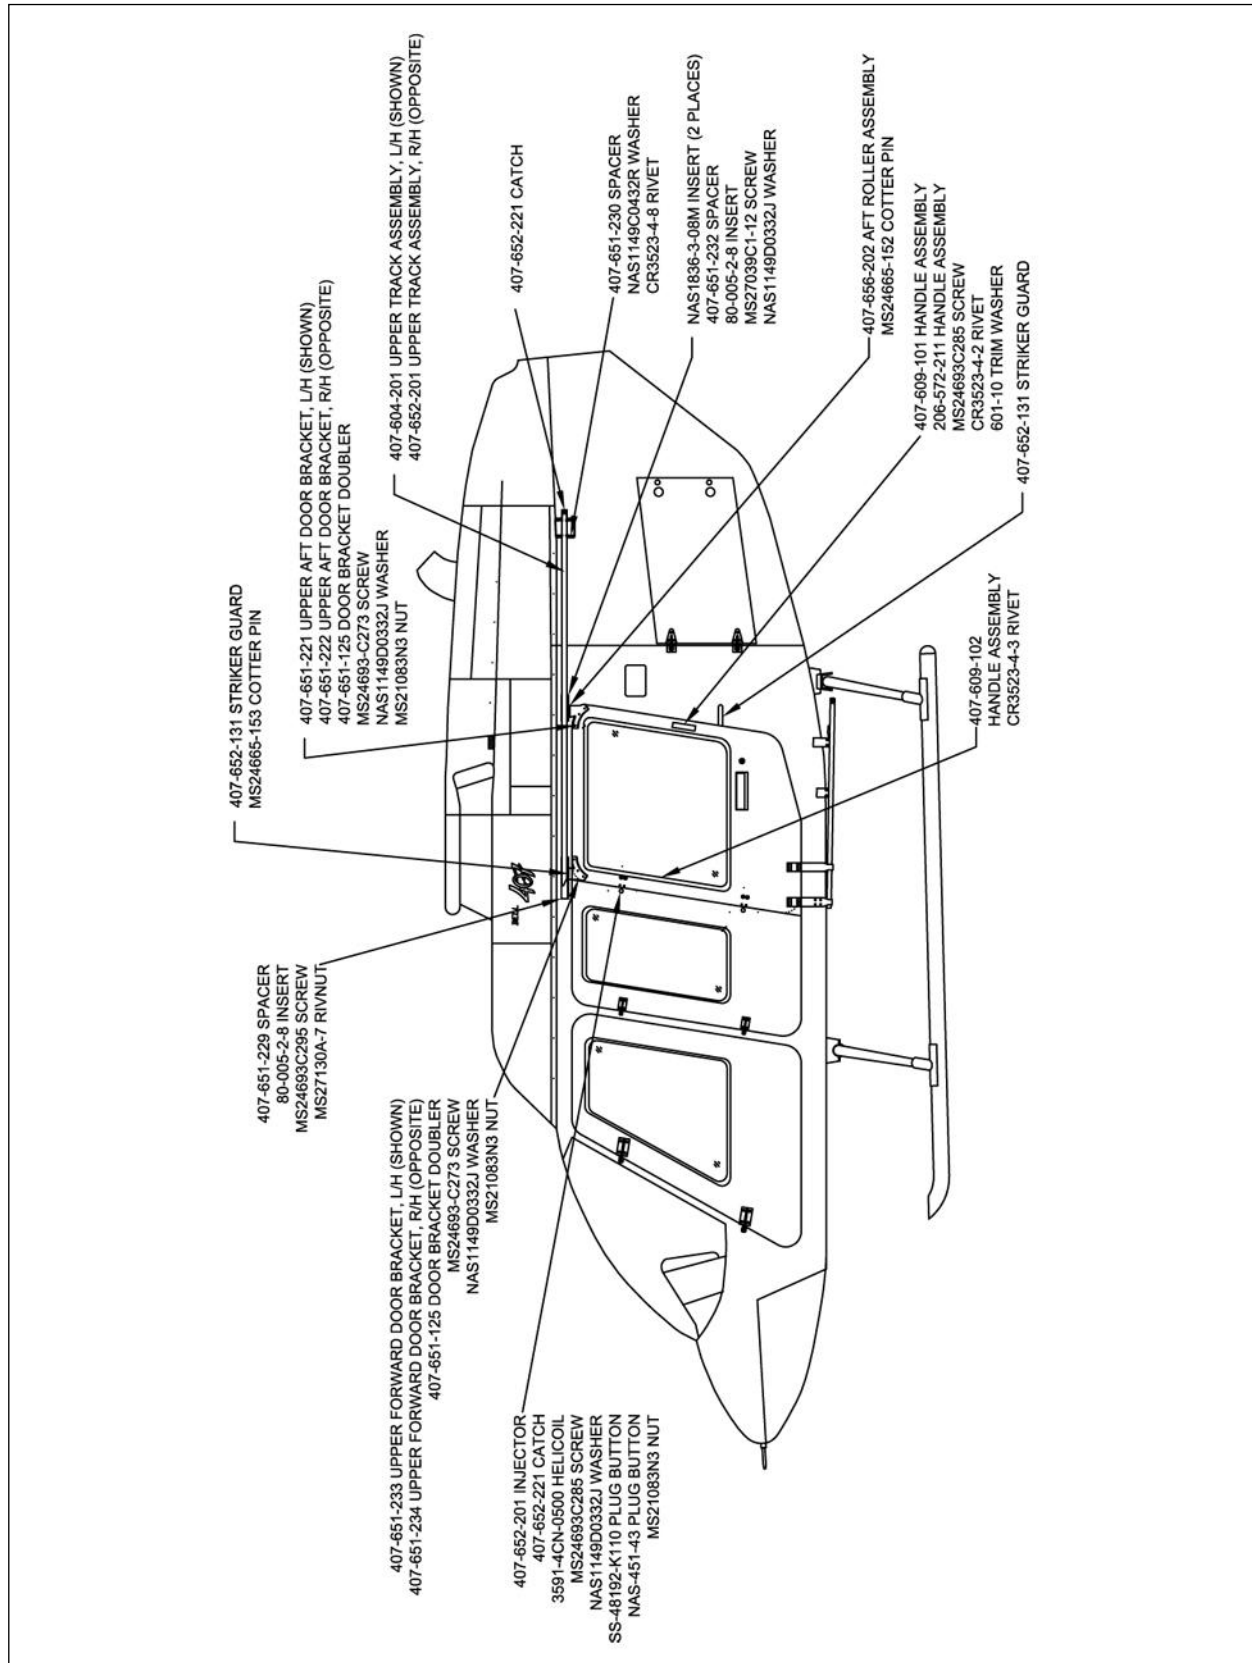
(SHEET 1 OF 2). PASSENGER SLIDING DOOR KITS
